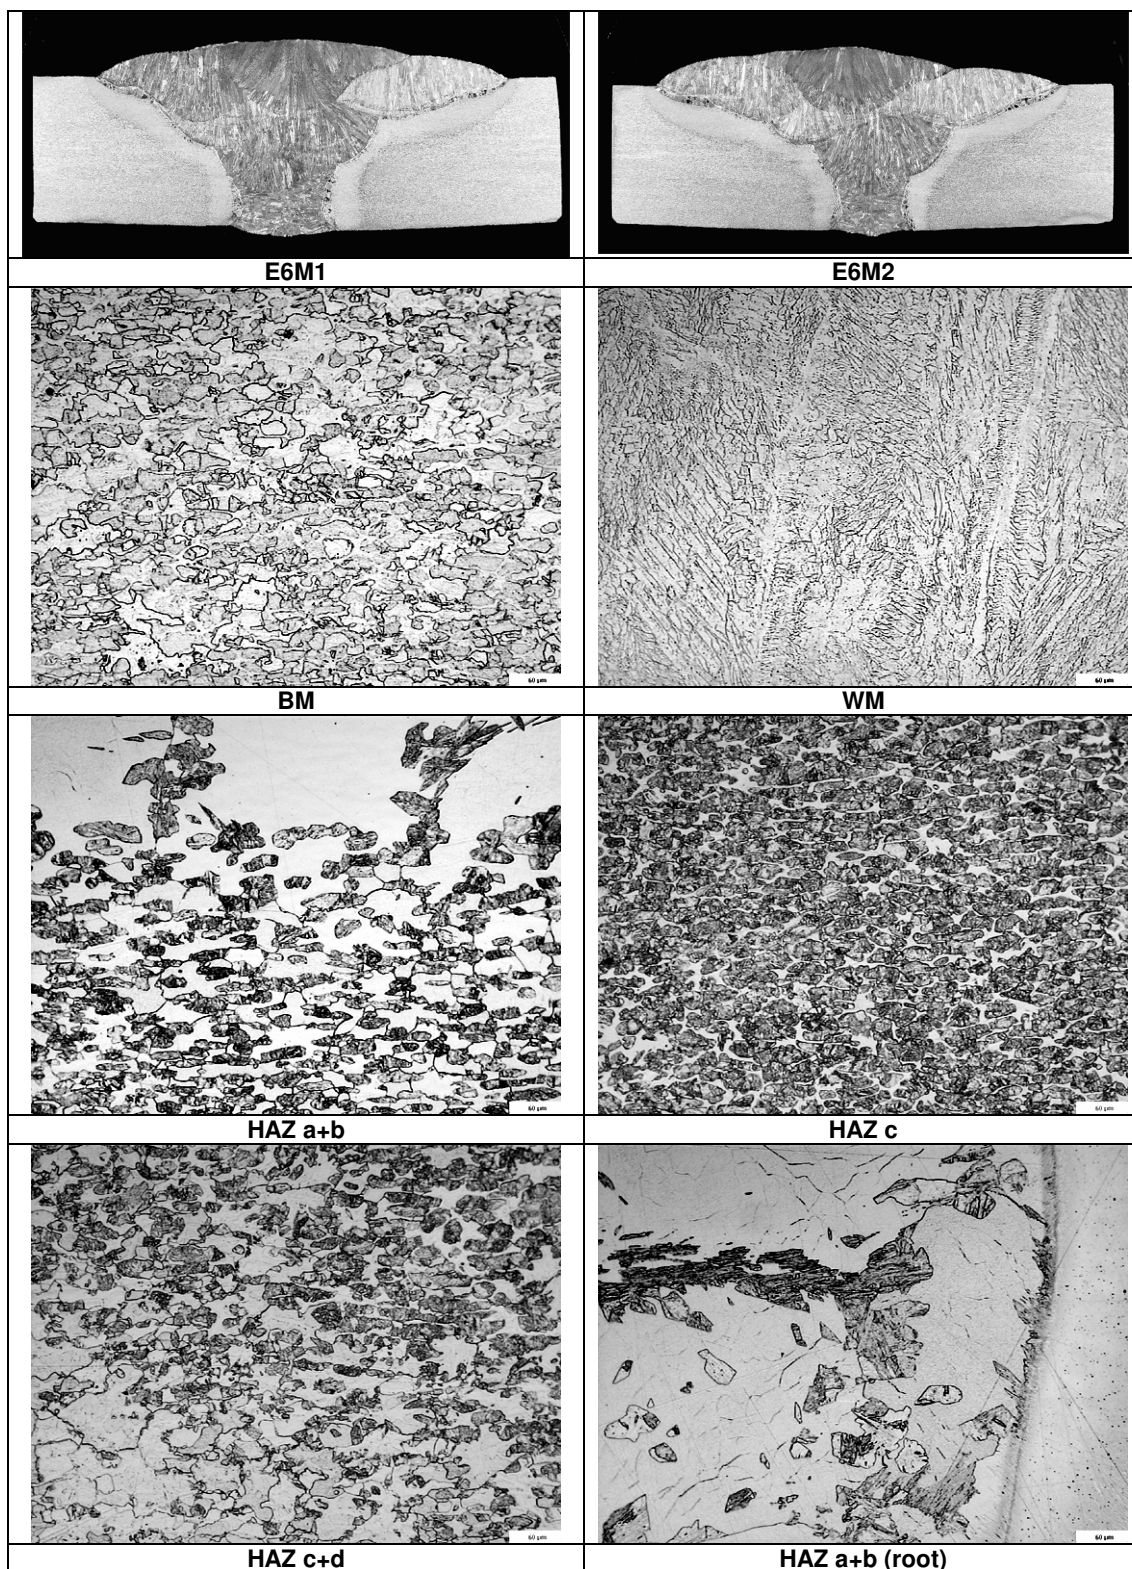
Macro and micrographs of 12 mm thick SAW weld with 316 filler (E6).
